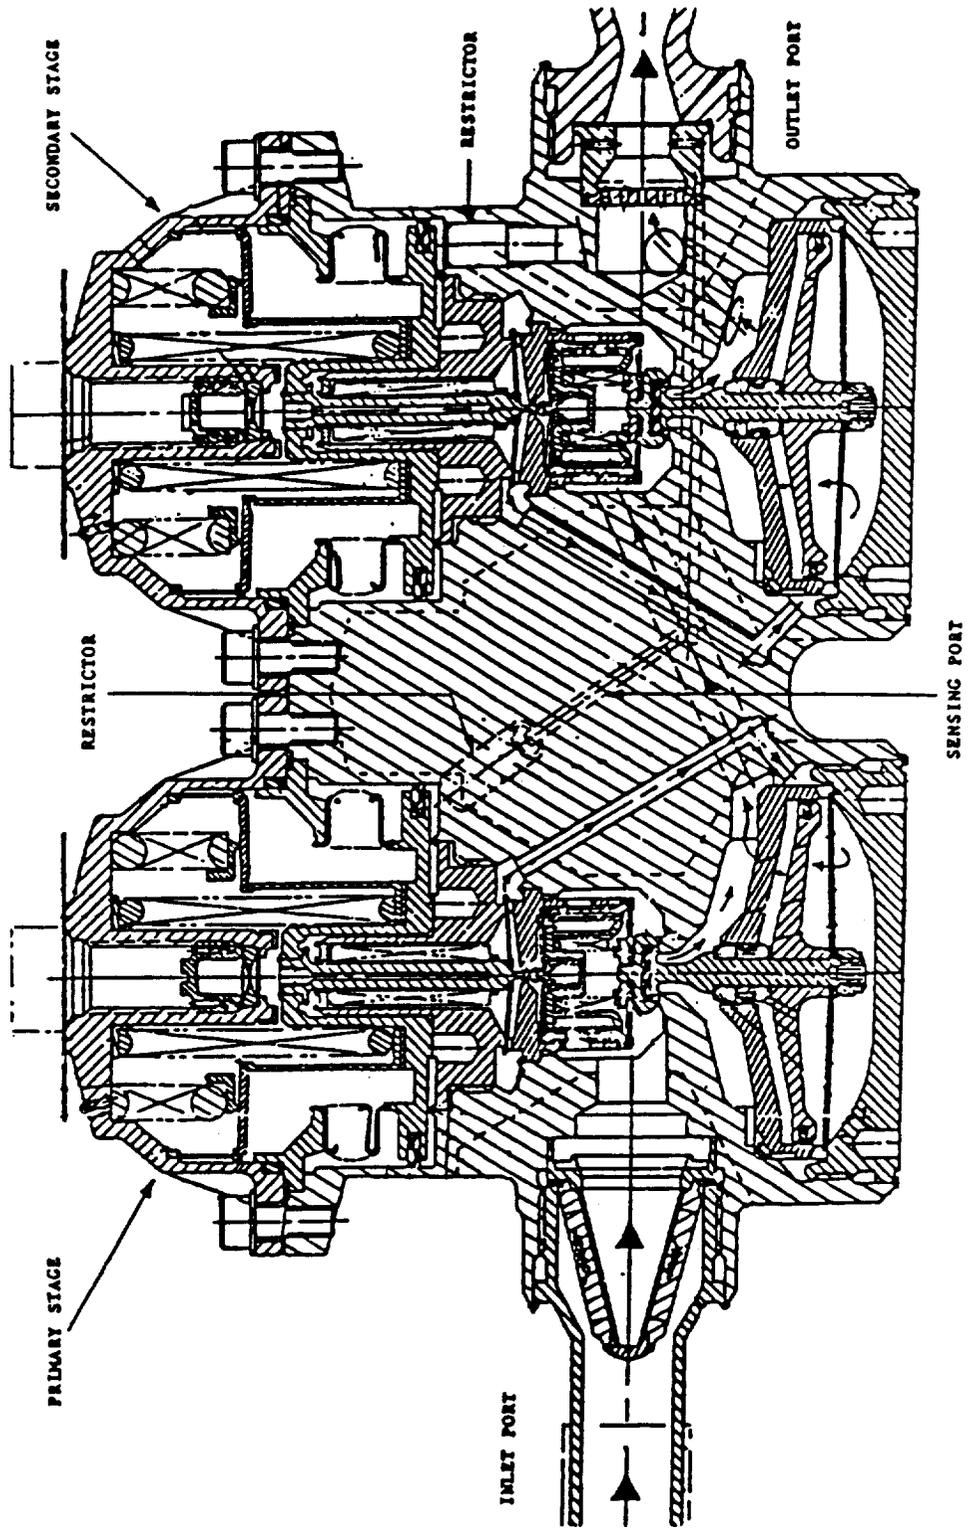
HELIUM PRESSURE REGULATOR ASSEMBLY
